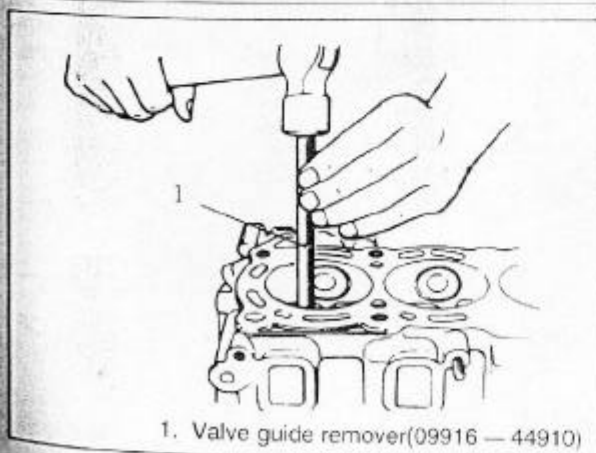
A — 47 REMOVAL OF VALVE GUIDE
